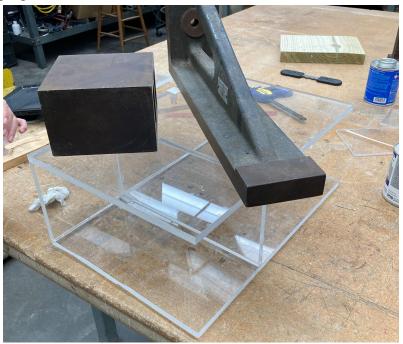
Acrylic sheets being welded to form the basic device structure
